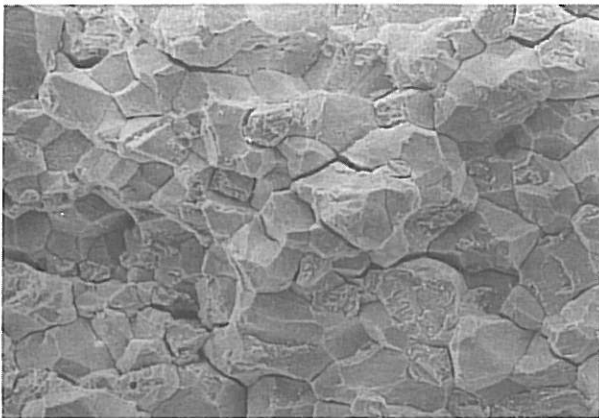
S.E.M. fractograph of a 24 h sensitized 304 austenitic stainless steel specimen strained in solution at a crosshead speed of 9.8 nm/s. Fractograph shows faceted intergranular and little transgranular cleavage fracture.
